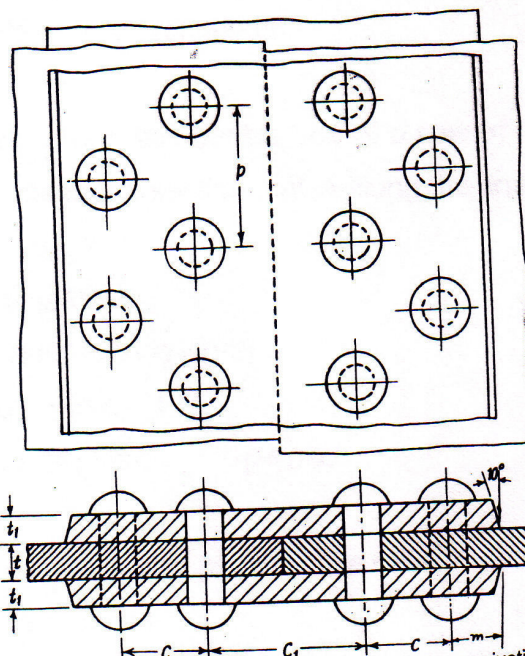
Double riveted double cover butt joint (Zig-zag riveting).
